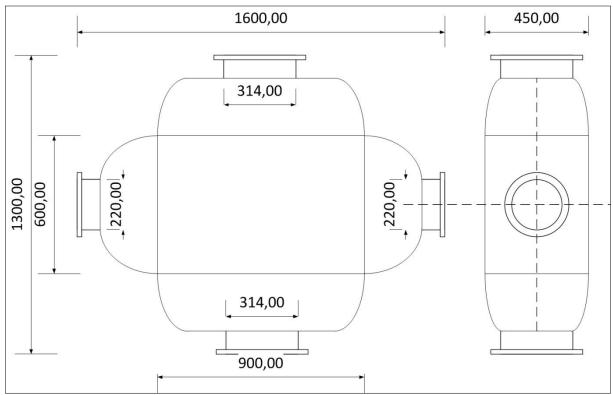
Indirect cooling with plate dump cooler: printed circuit dimensions, with heads and nozzles
